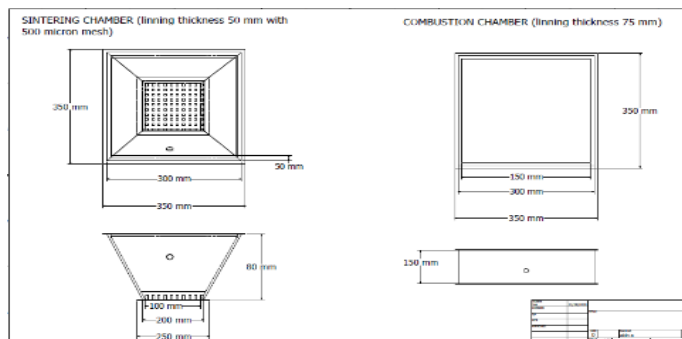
The Front and Plan View of the Sintering and Combustion Chamber.
